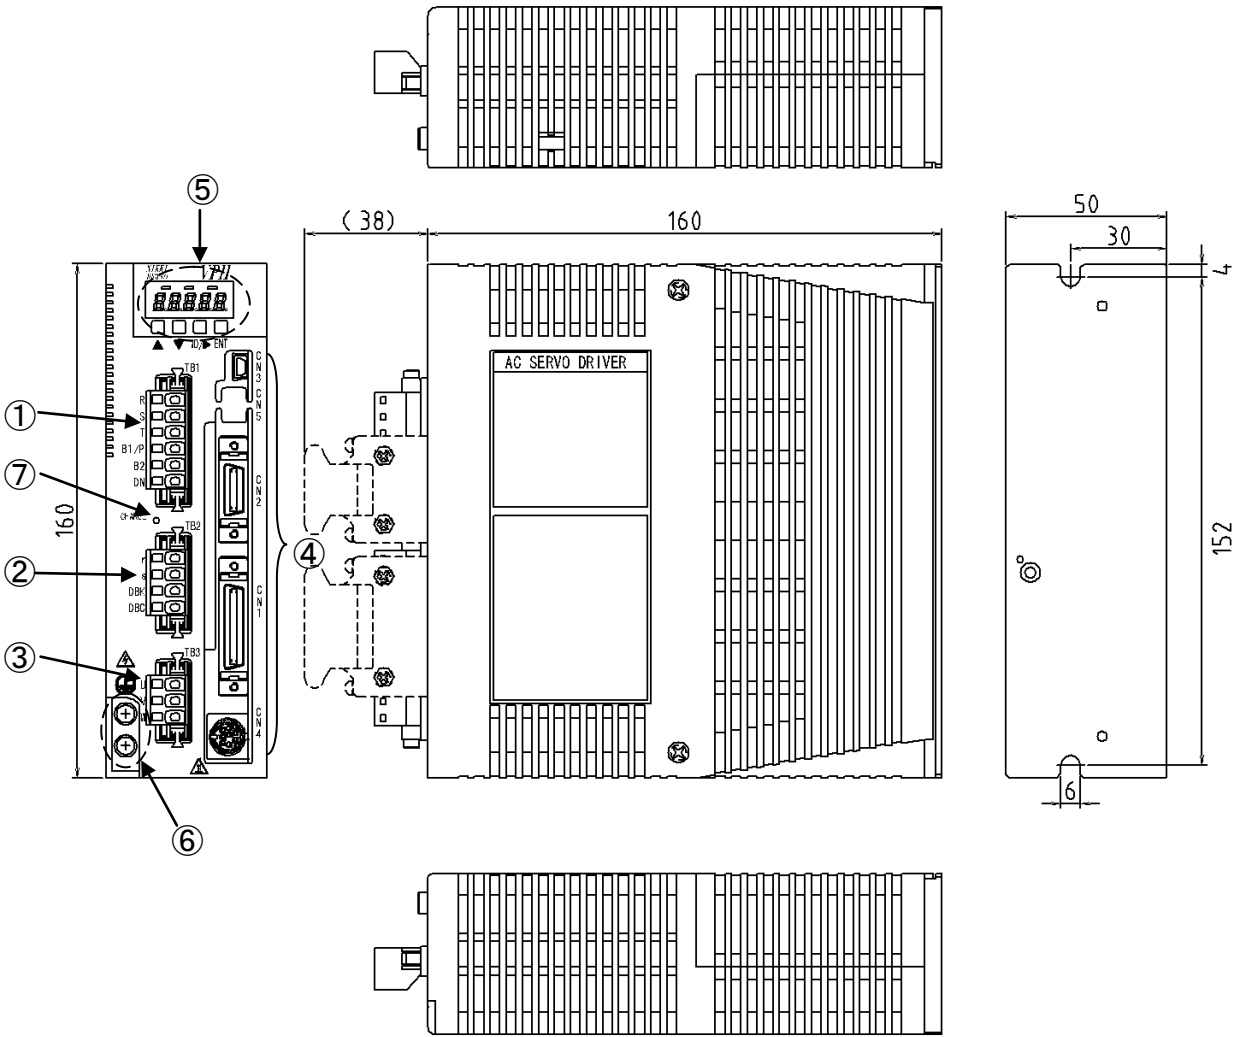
Outline drawing of the main unit of the device with up to 400W (Type 1)
